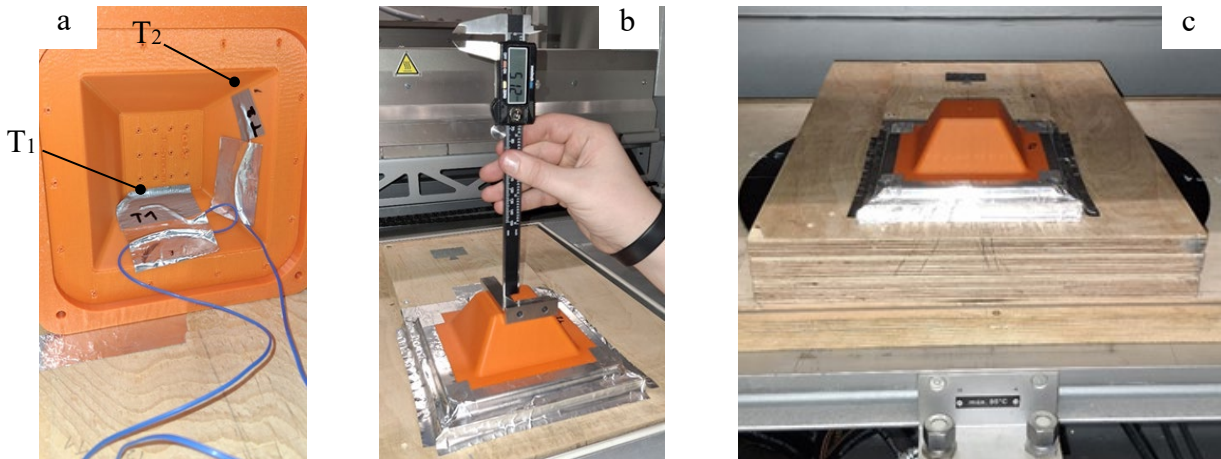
(a) Position of thermoelements T_1 and T_2 , (b) measurement of deflection of the top plate with digital calliper, (c) mould installed in the thermoforming machine Illig UA 1100 ed.
